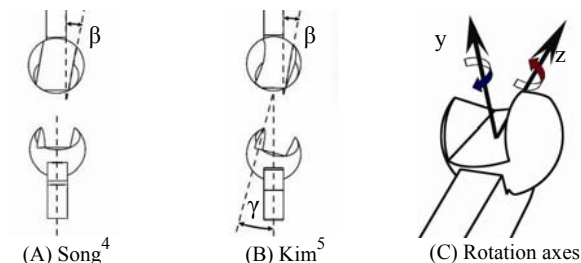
Geometry of the cutter heads in the previous designs of deburring tools for intersecting holes.
